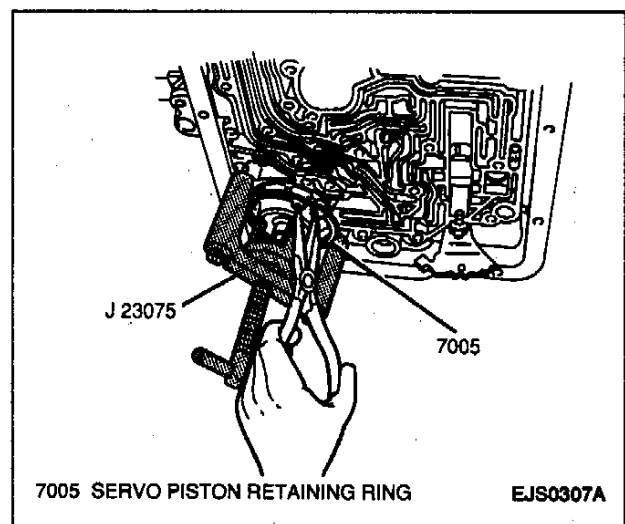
Removing Servo Piston Retaining Ring (3L30, 3-Speed)
